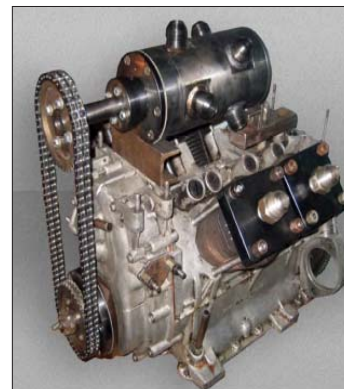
Pneumatic engine assembled with spool air distributor (without tubes connecting cylinders with spool)
